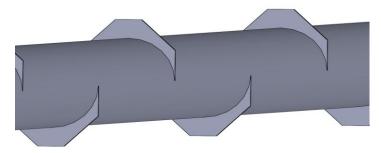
Inner Circular Tube having Pentagonal Shape Inserts Having Spacing y = 45cm
